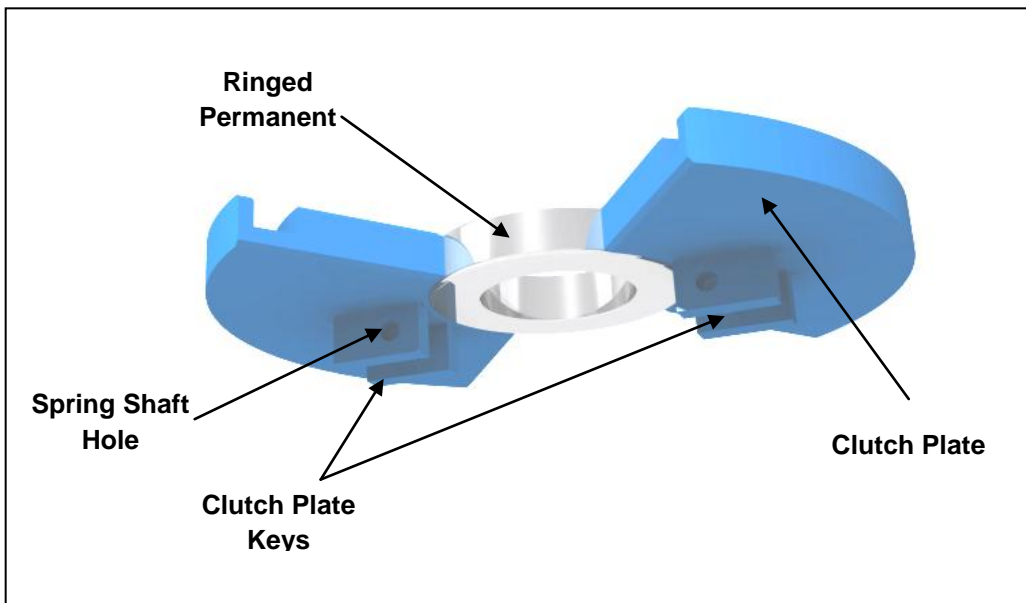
Bottom View of the Two Clutch Plates and the Permanent Magnet
